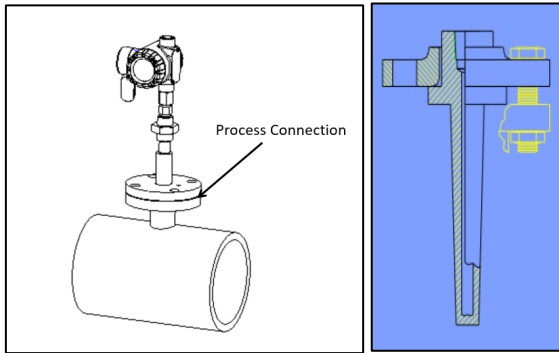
STT85A FLANGED TYPE MOUNTING TO PROCESS CONNECTION
